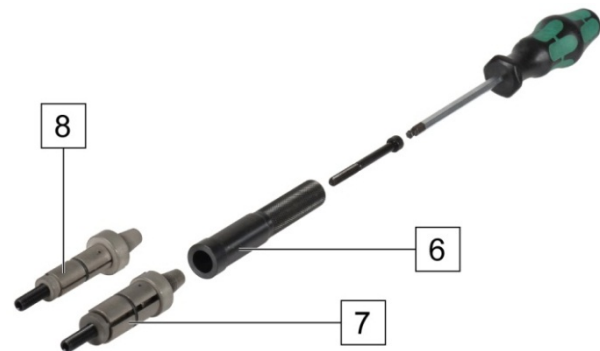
Tensioning spindle, guide pin, hexagon socket screw and hexagon socket screwdriver
